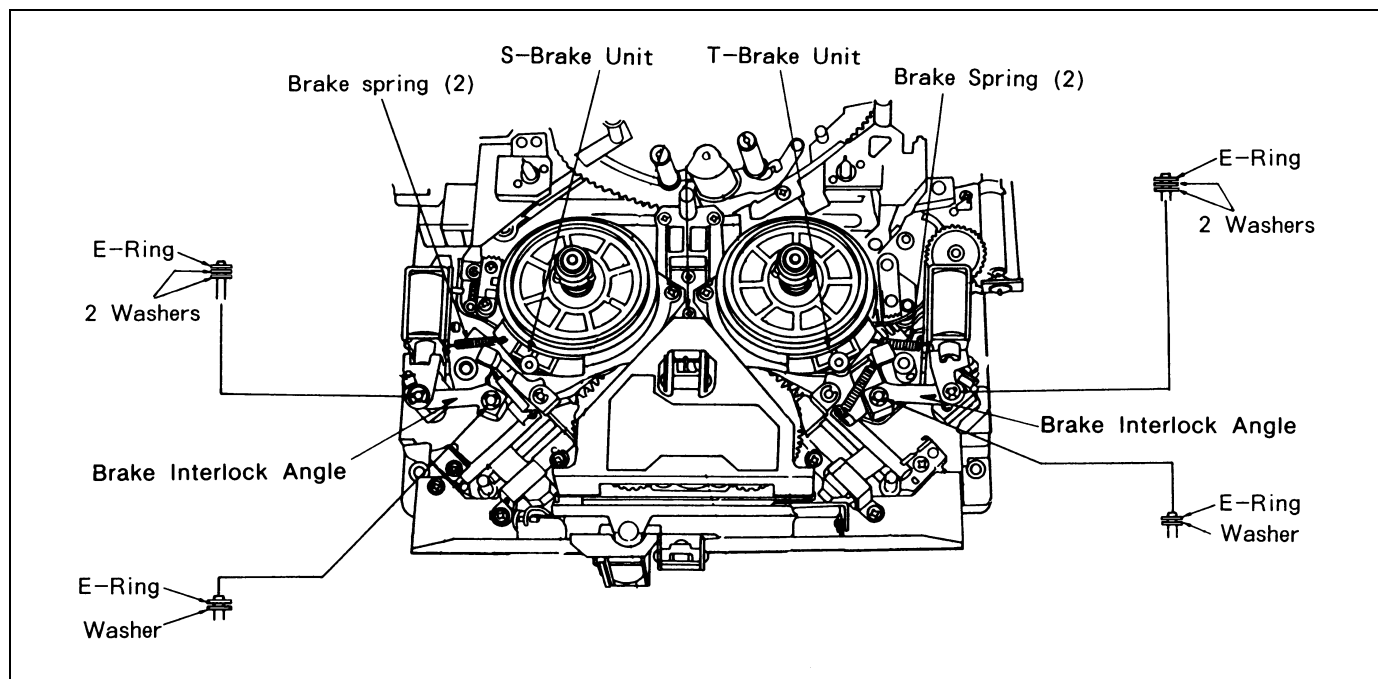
Removal of the S-Brake Solenoid and the T-Brake Solenoid
